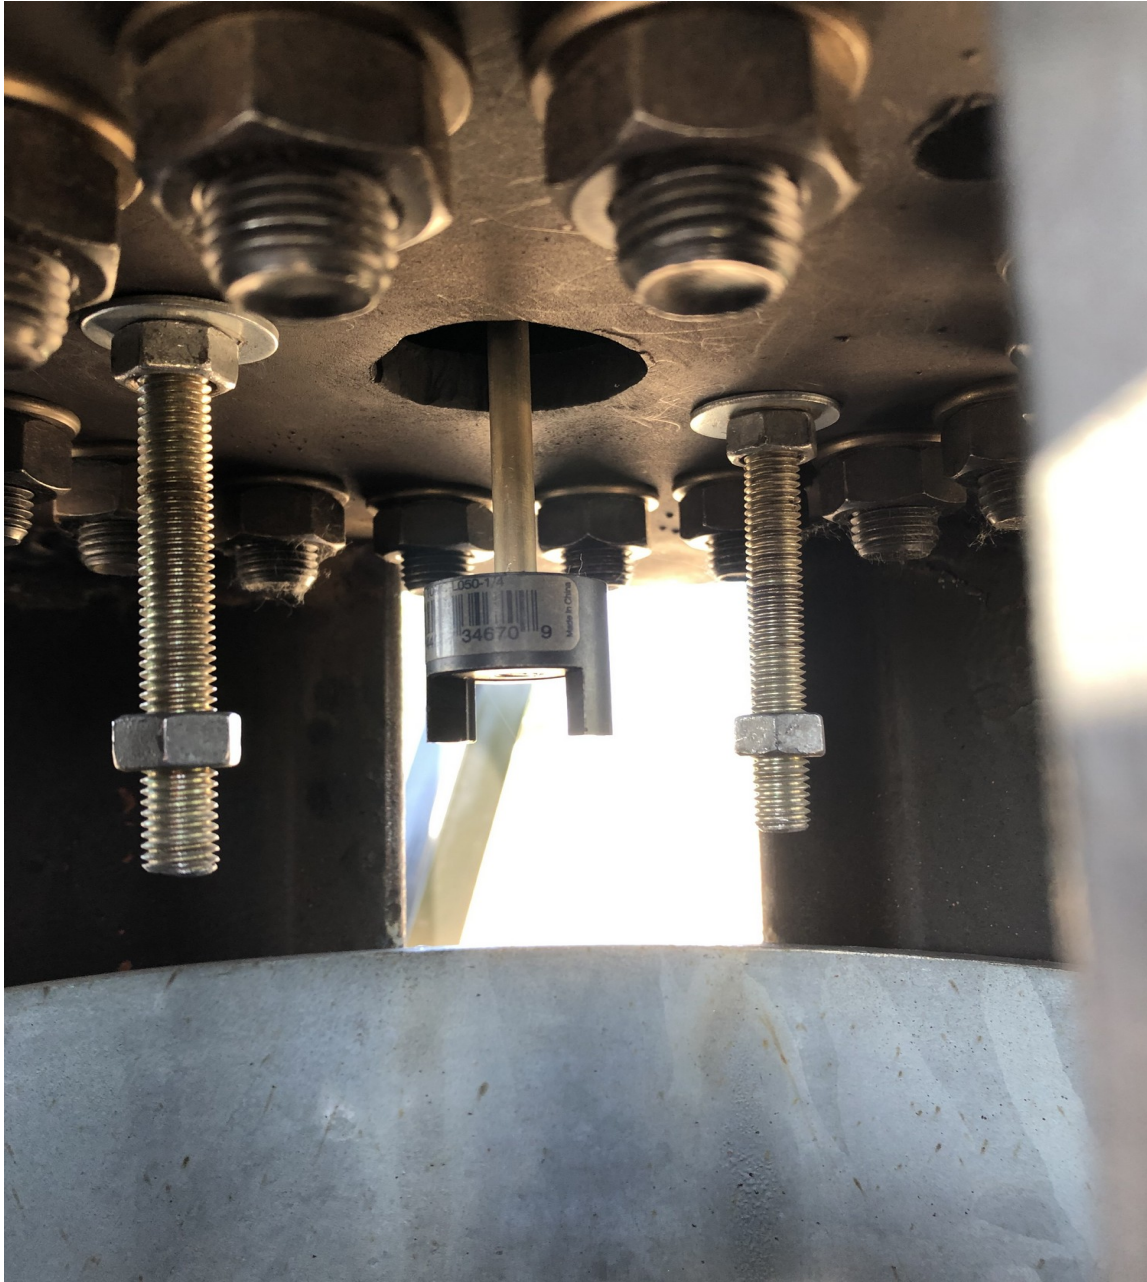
After installing the AZ encoder plate mounting studs into the stationary bearing plate it is seen that the coupling shaft should be trimmed about 1-1/2" shorter to allow room for the lower AZ encoder coupling, encoder body, and the encoder mounting plate.
